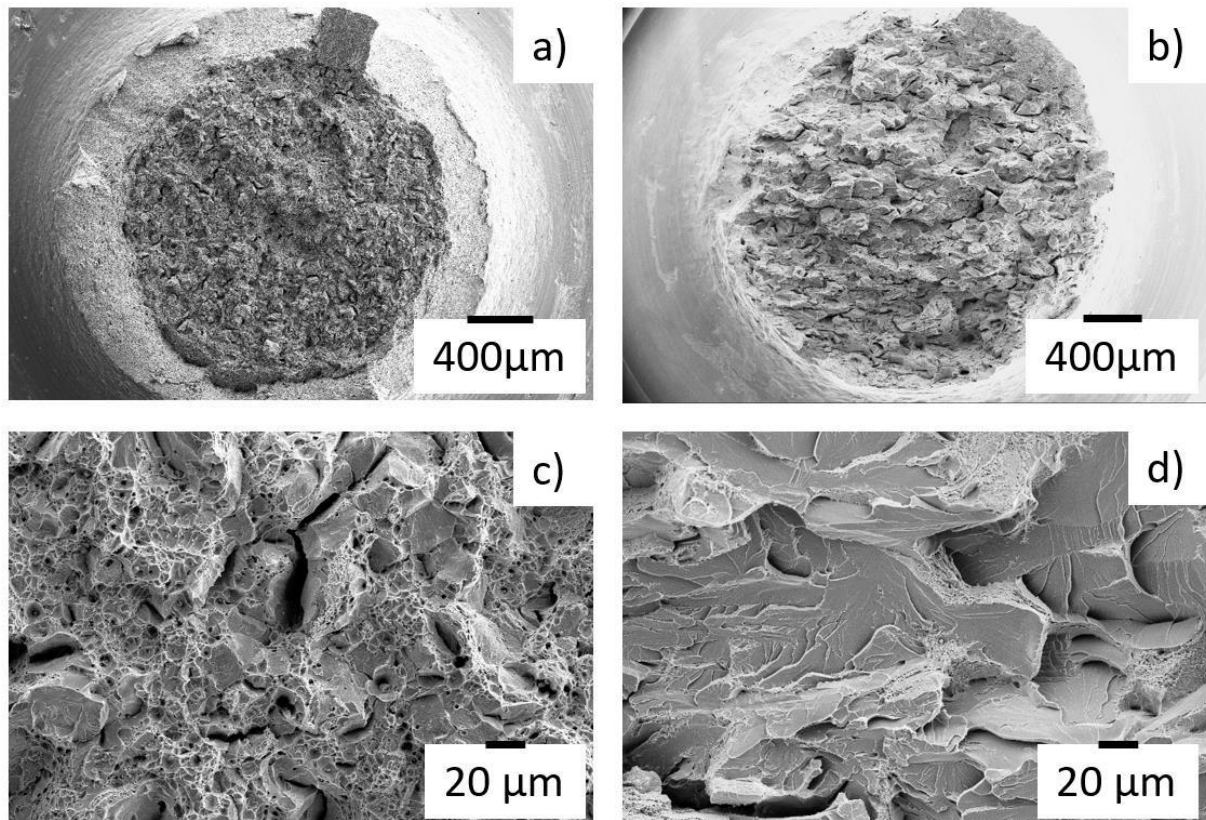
4: Fracture surfaces after tensile tests in air of notched specimens of: (a), (c) wrought steel showing mainly ductile behavior with dimples and (b), (d) SLM-ed steel showing brittle behavior with cleavage.
